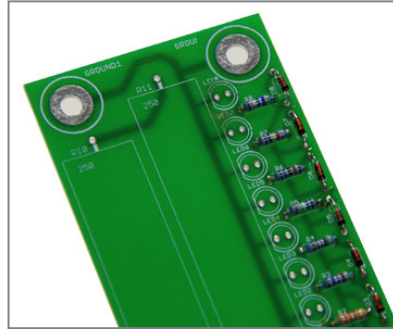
Diodes D8 through D3 correctly soldered to the board
